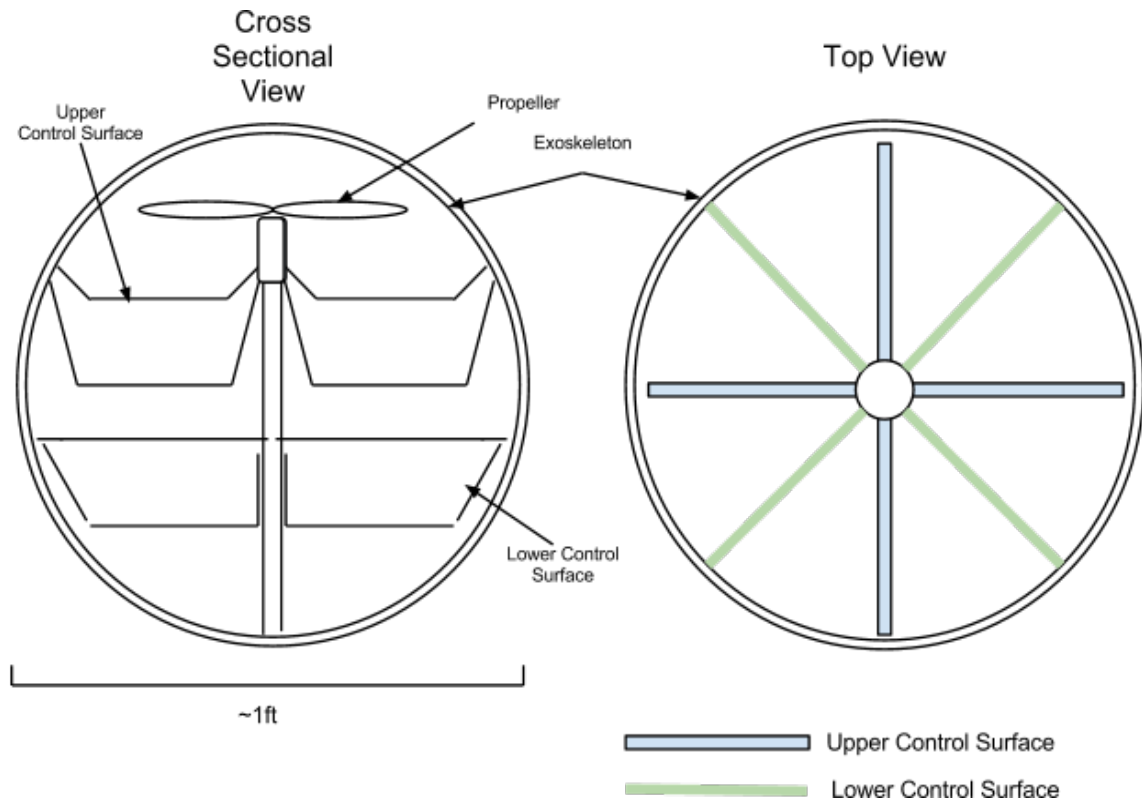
Cross Section View and Top view of the Initial Frame Design
